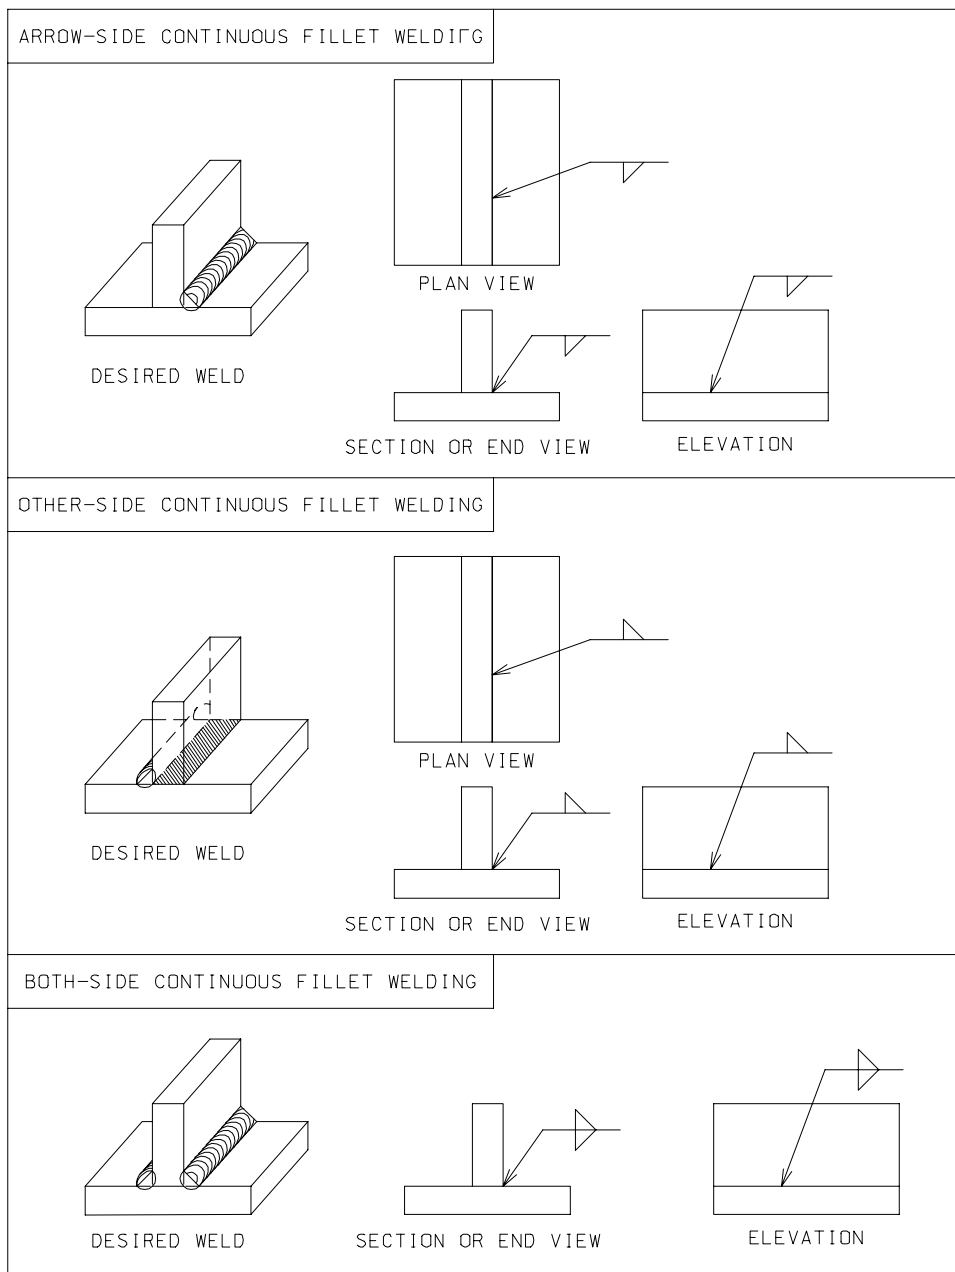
Application of Symbols - Fillet Welds - General
